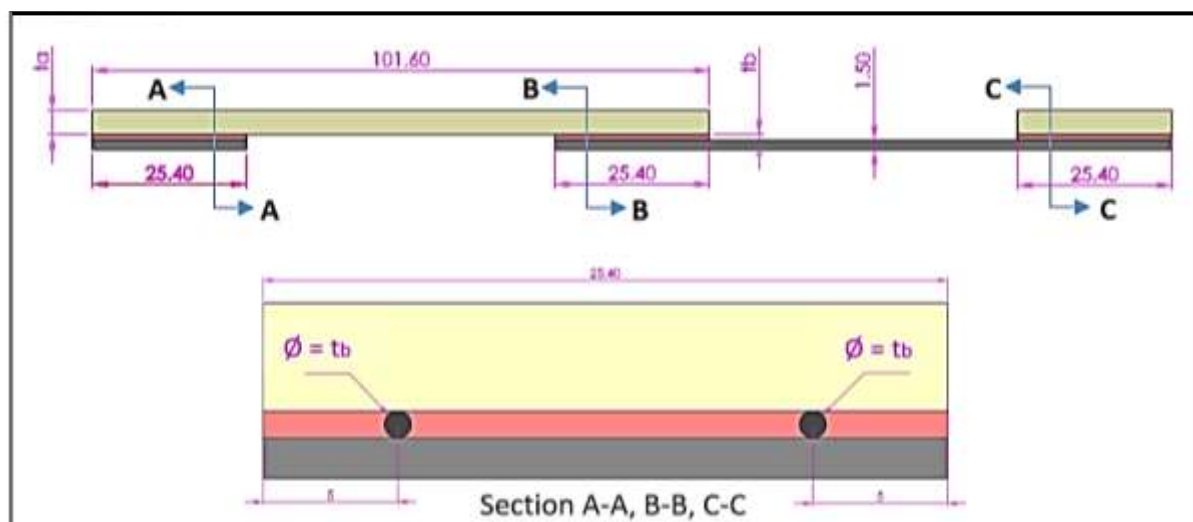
Specimen configuration of the adhesively bonded single-lap joints. Section view showing the cross-sectional geometry at region A-A, B-B and C-C, picturing the calibrated aluminium wire spacers which were used to control bondline thickness. (*not to scale, dimensions in mm*)
